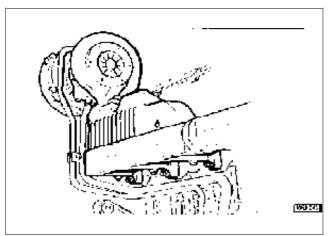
On turbocharged engines: install the turbocharger assembly following the instructions given on page 89;
